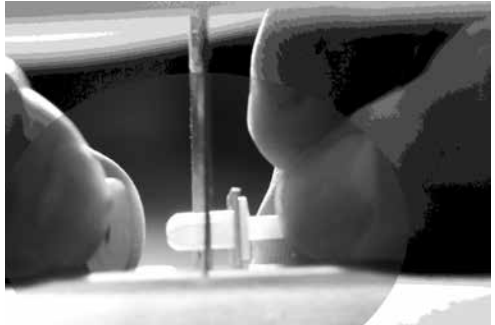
Attach linkage strip to louver using nylon linkage pin assembly
